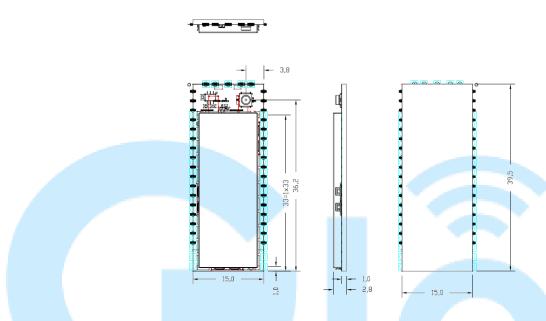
GL6509 PIN HEADER VERSION DIMENSIONS
